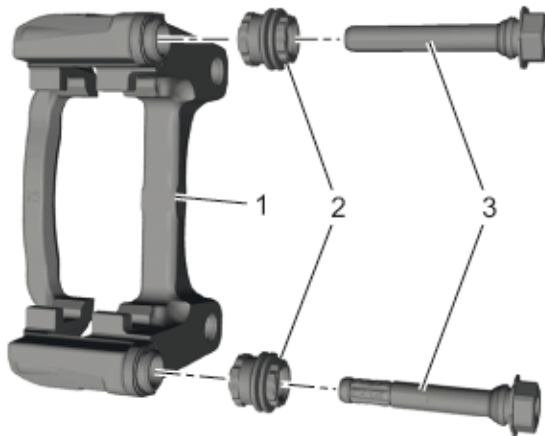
Brake Caliper Guide Pins, Boots And Caliper Mounting Bracket
